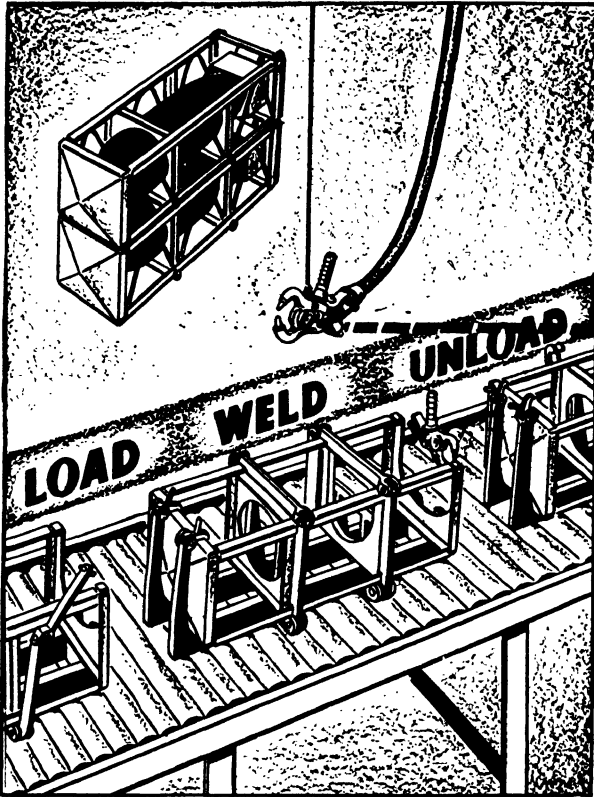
Method of assembling and spot-welding bomb racks in fixtures that are passed along an assembly line over a roller conveyer. (Courtesy of Progressive Welder Company.)
